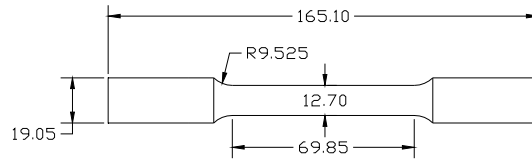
Dogbone mechanical test specimen dimensions (units in mm).
